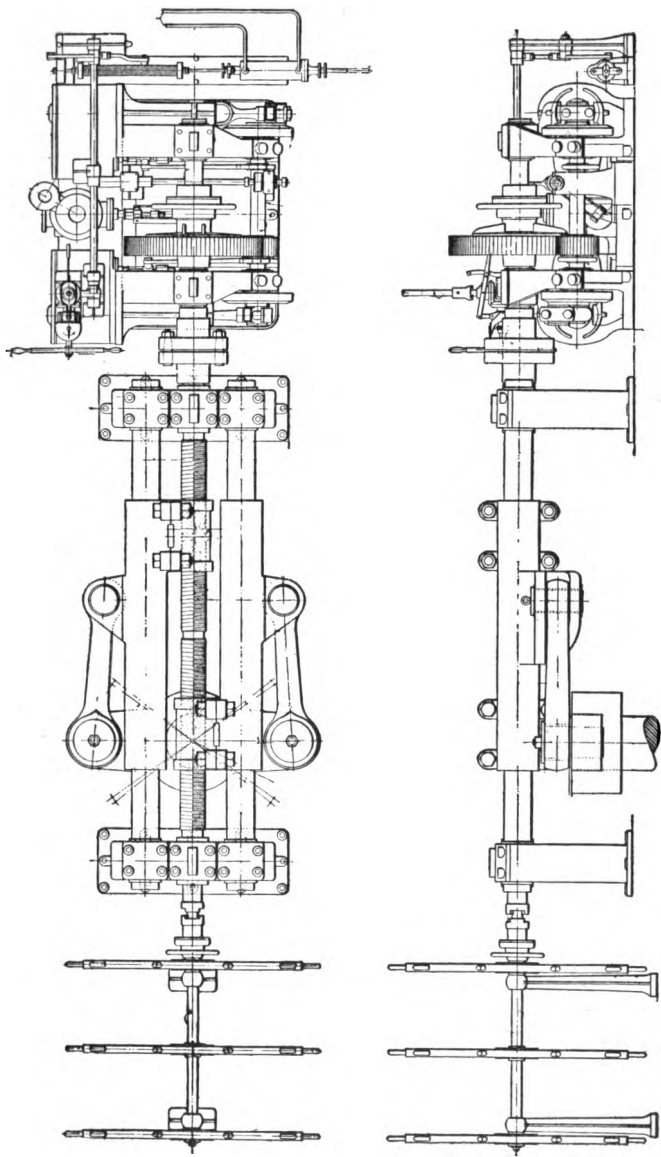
Steering Engine with Screw Steering Gear. (Hyde Windlass Co., Bath, Me.)
